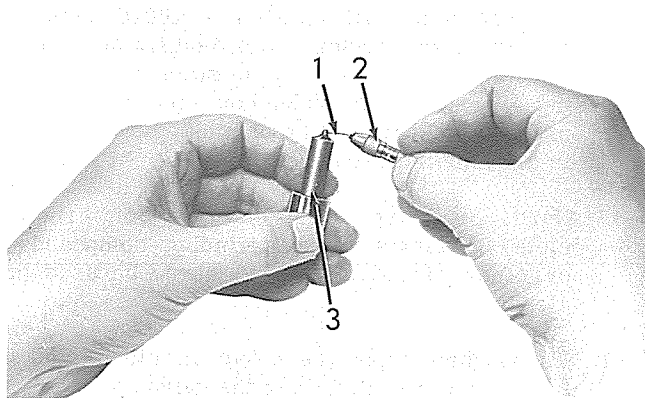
Cleaning Holes in Nozzle Valve Body (T-23244)
